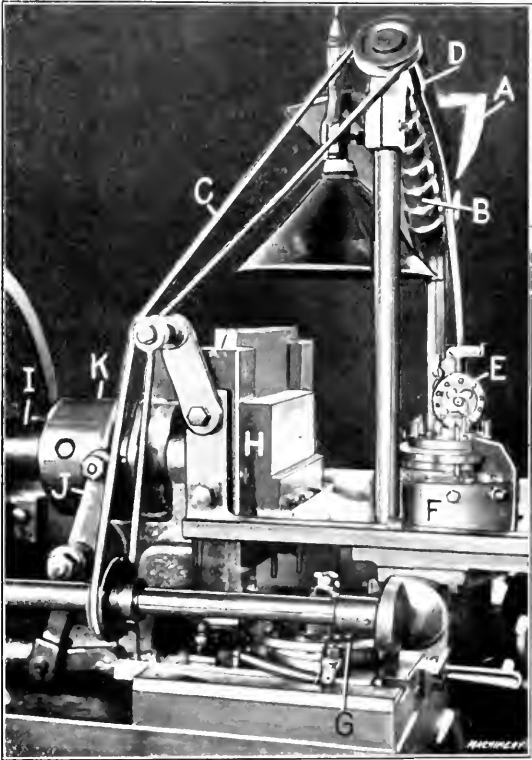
Machine used for cannelluring Spitzer Bullets; also for sizing them
